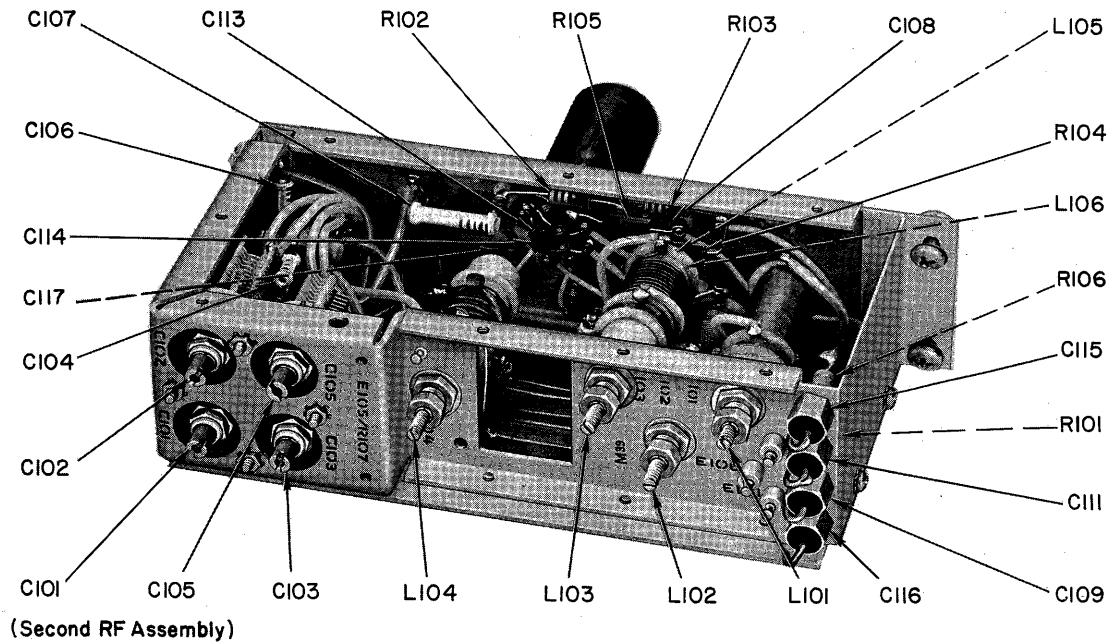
Preselector, Location of Parts (Sheet 3 of 3)
